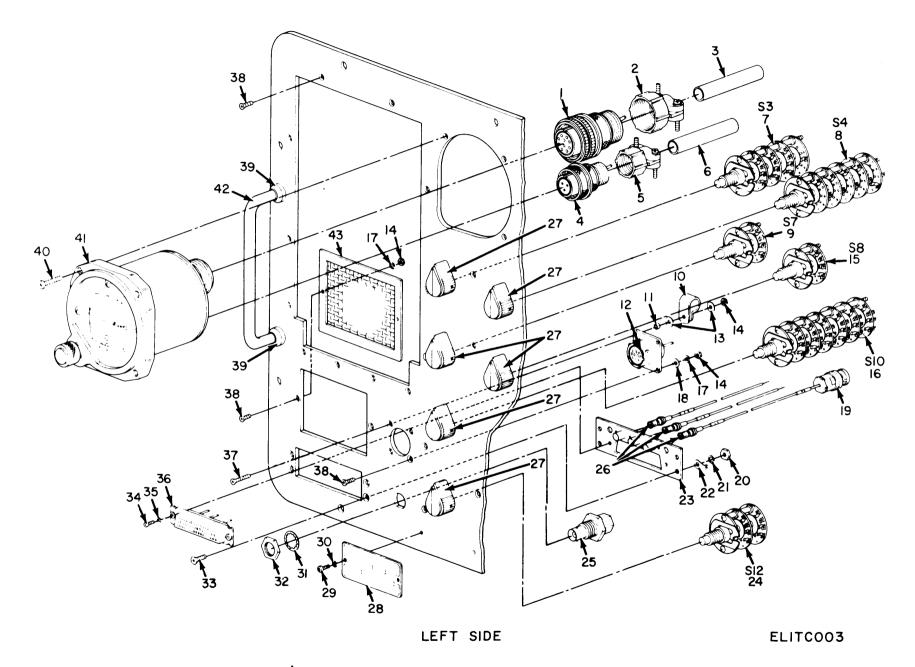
Front Panel Assembly (SMB-504958) (Sheet 1 of 2).
